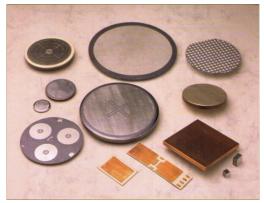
The variety of diffusion welded multilayer contact compositions applied to semiconductor devices
